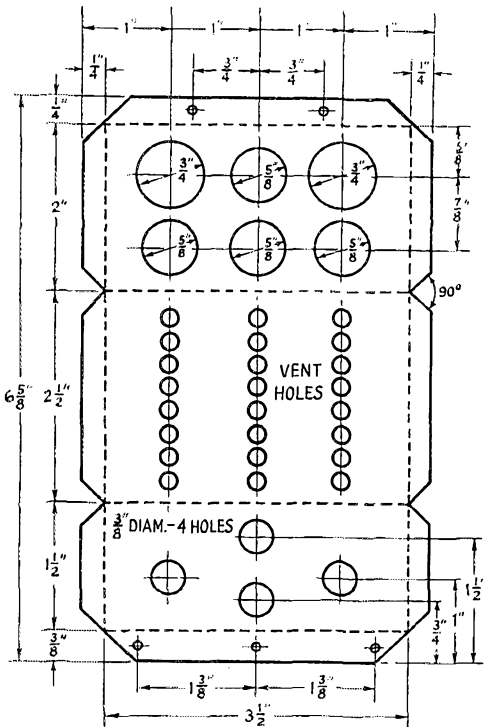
Layout of main subassembly. Right-angle bends are made along the dotted lines. (Refer to photographs for direction of bends.) Small holes are for self-tapping mounting screws. Dimensions are in inches.
